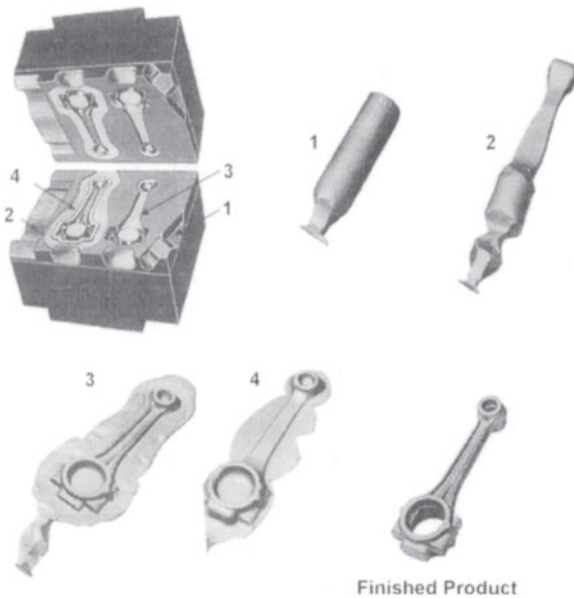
Impression forging dies with forging sequence. (From Ref. 3.)
